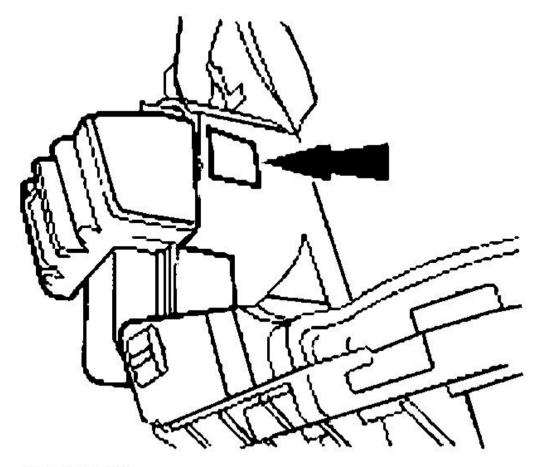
Releasing Locking Tabs And Removing Switch Courtesy of FORD MOTOR CO.
